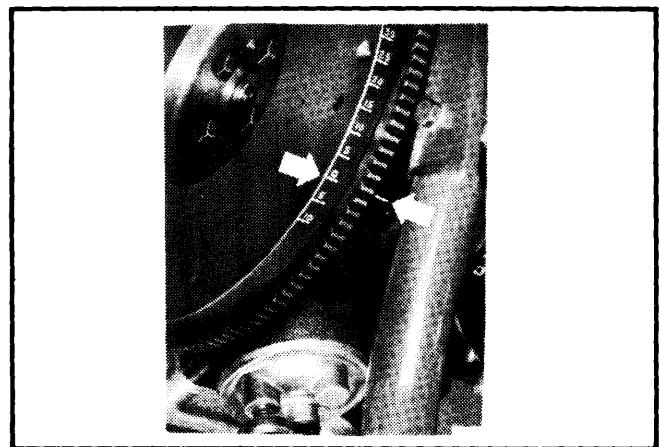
Aligning "O" Degree Mark on Flywheel with Mark on Cylinder Block.
